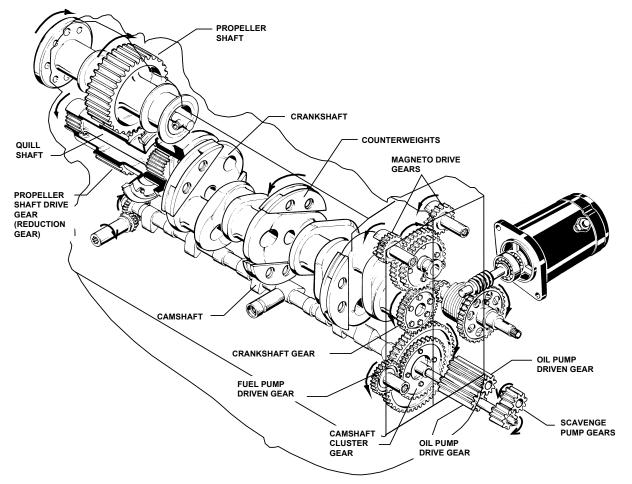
Engine Drive Train Schematic - Geared Engines
